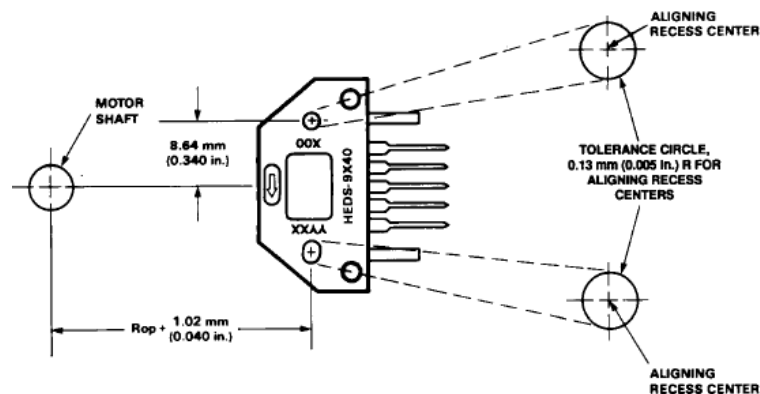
HEDS-9X40 Mounting Tolerance.
